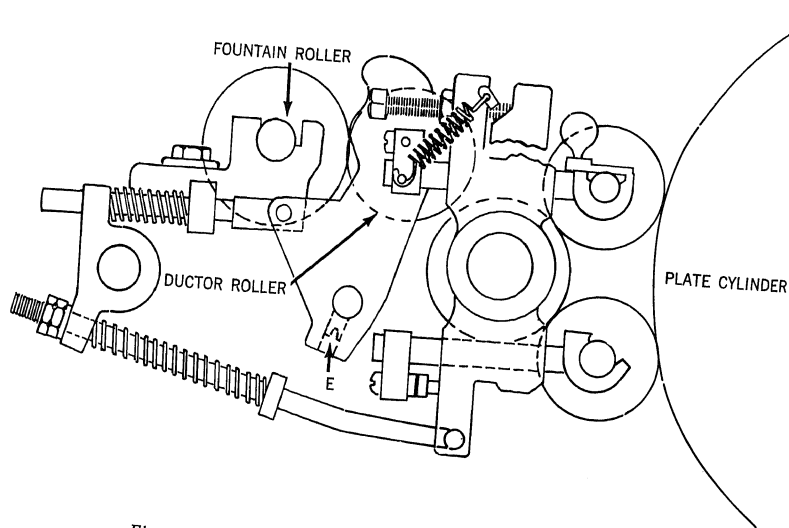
Setting and adjusting ductor roller (dampening assembly).
